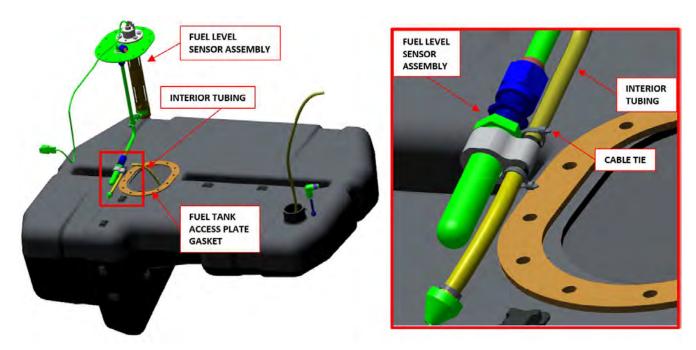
FUEL LEVEL SENSOR ASSEMBLY
